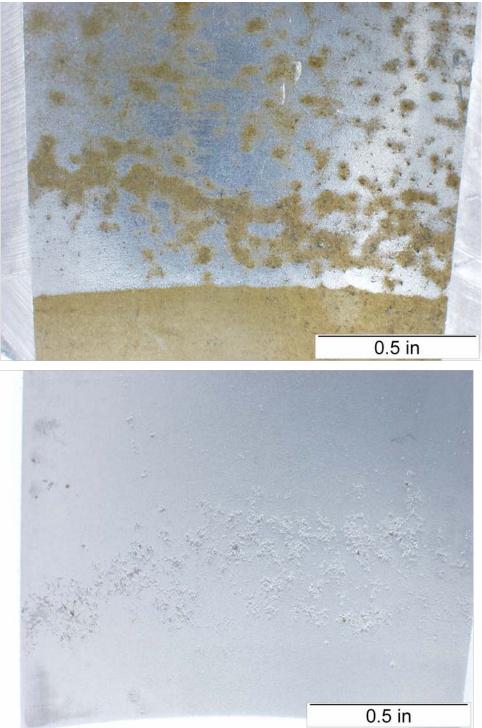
Adjacent bushing bore surfaces containing band of IGC. Top) No Alteration, anodize still present; Bottom) Surface after gentle glass blasting which removed surface coatings and enhanced visible indication of corrosion damage
